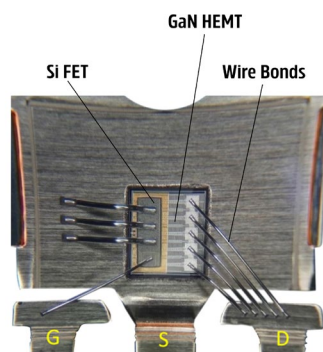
SuperGaN FET die-on-die assembly (TO-247 test vehicle). Can be done in surface mount packages, like PQFN, TOLL, TOLT, or modules.
